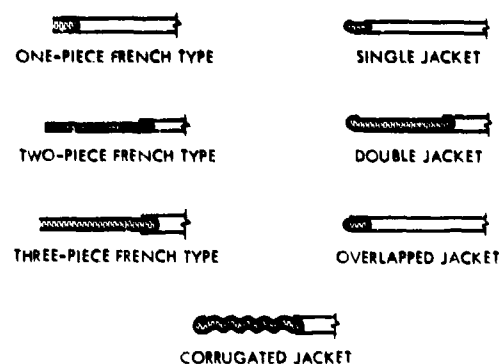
Metal-Jacketed Gasket Configurations
